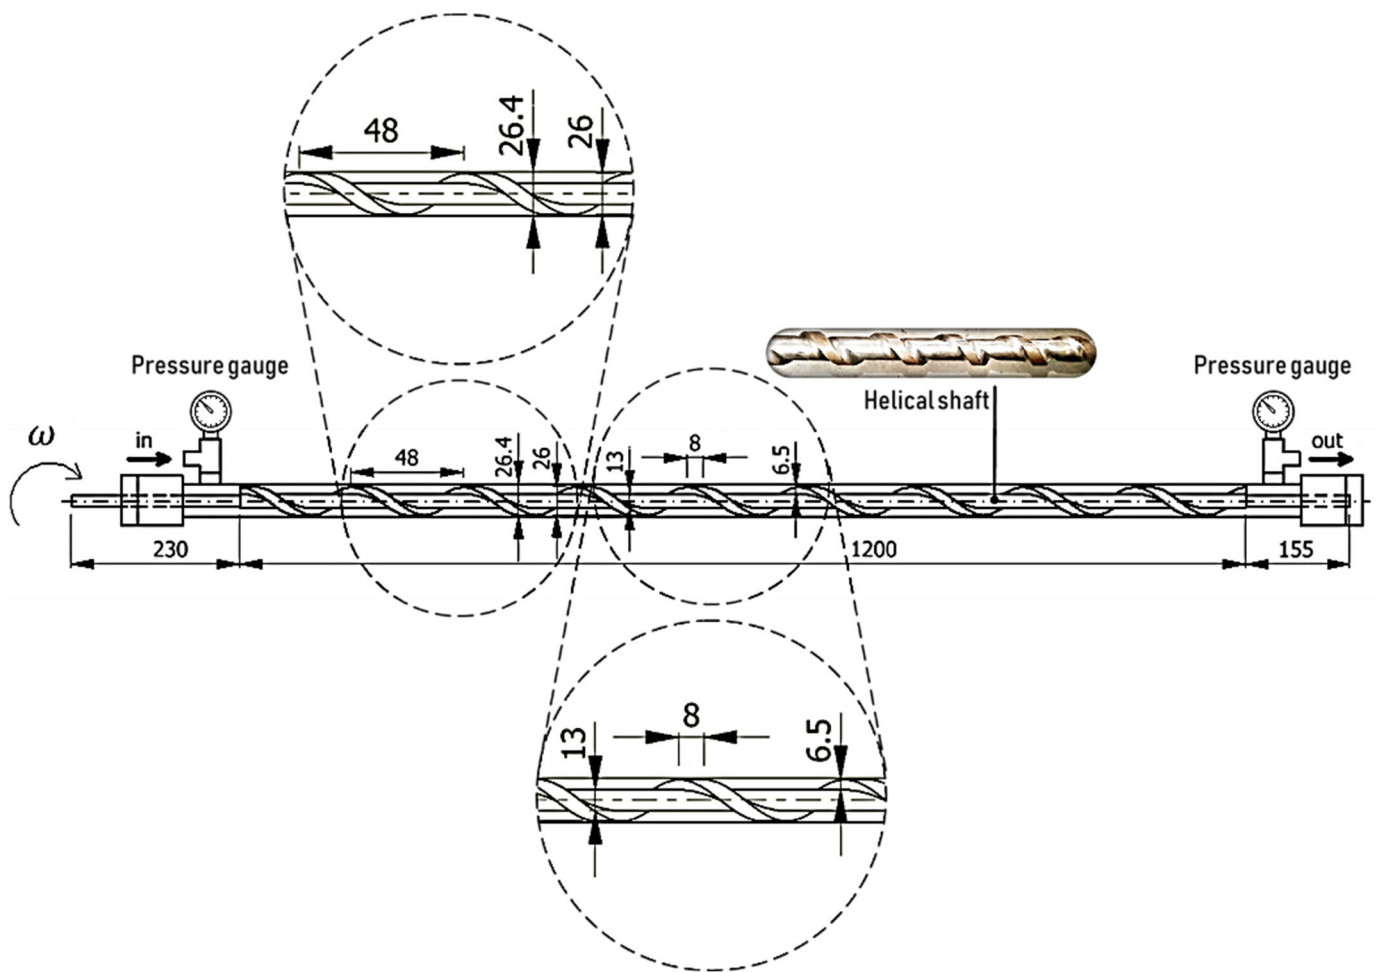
Longitudinal section of the helical shaft inside the receiver tube, dimensions in mm.
